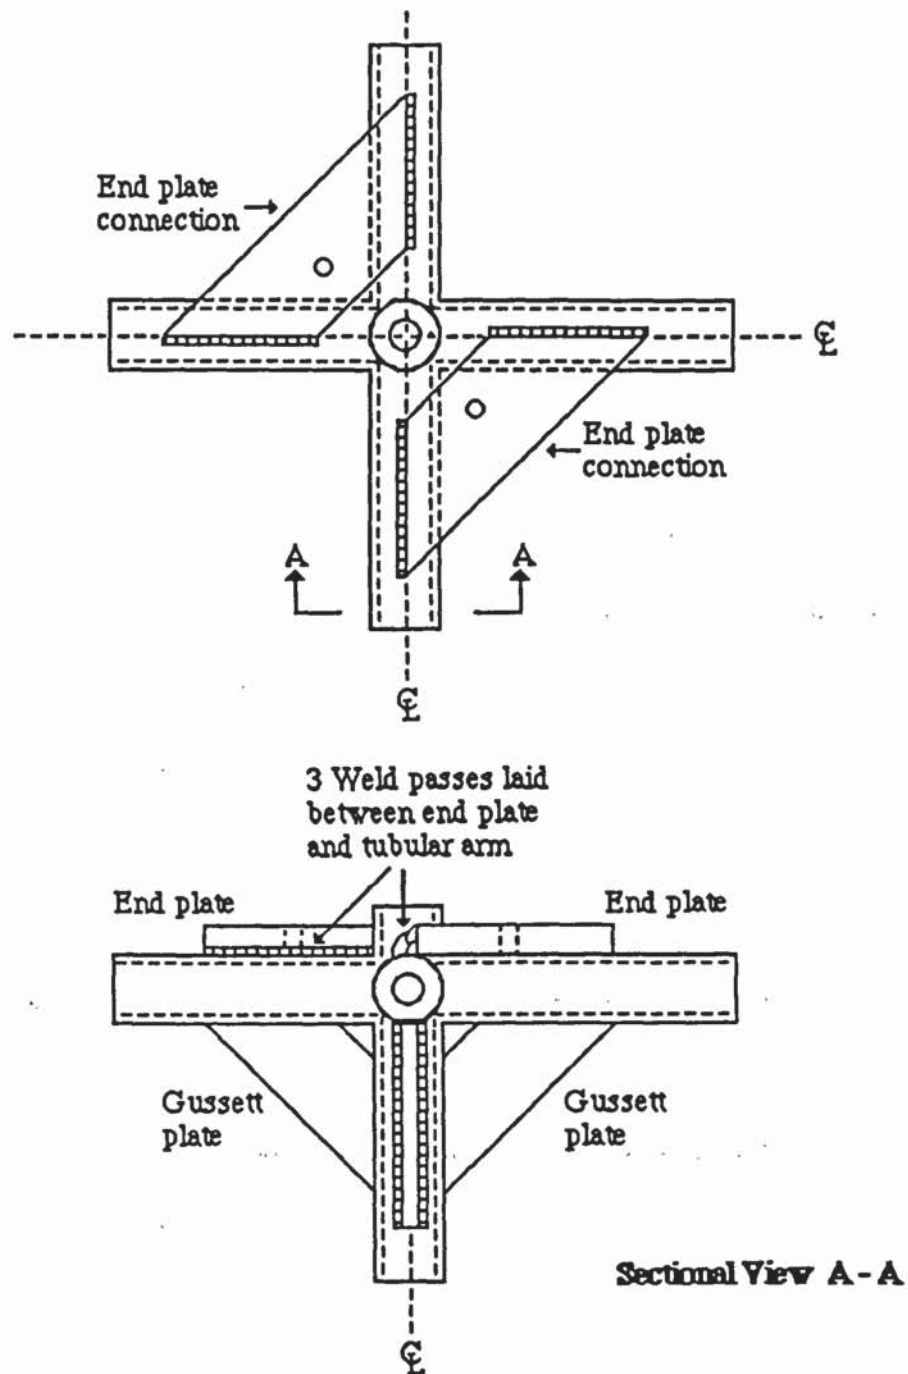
View of end plate connections and gusset plates welded onto tubular arms.
